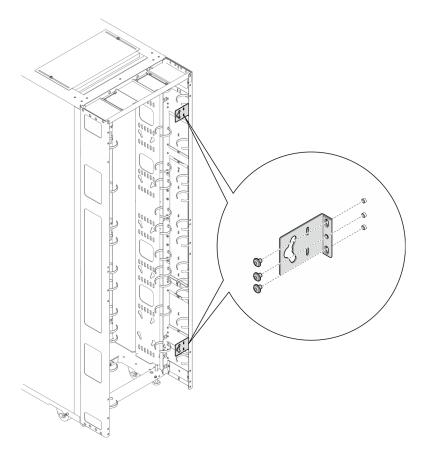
Installing the L-shaped bracket with the PDU facing the front of the rack cabinet
